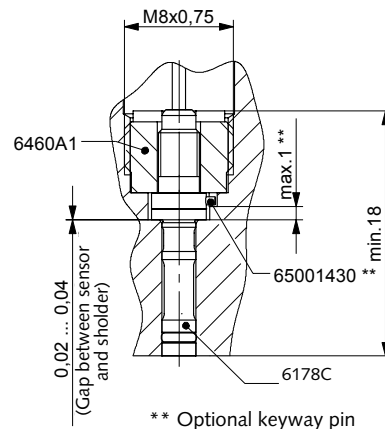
Installation of Type 6178CXUSRS... or 6178CYUSRS... with mounting nut
